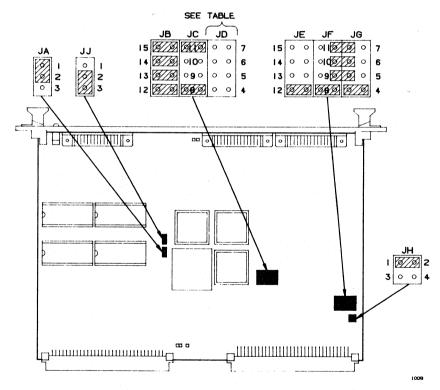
Solbourne Multiplexer Board Default Jumper Settings
